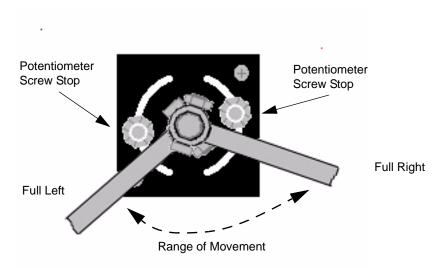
Confirm Maximum Steer Right Position on Left Axle
